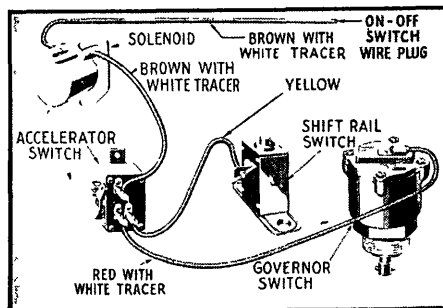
Vacuum clutch control lower circuit, 1942-47
